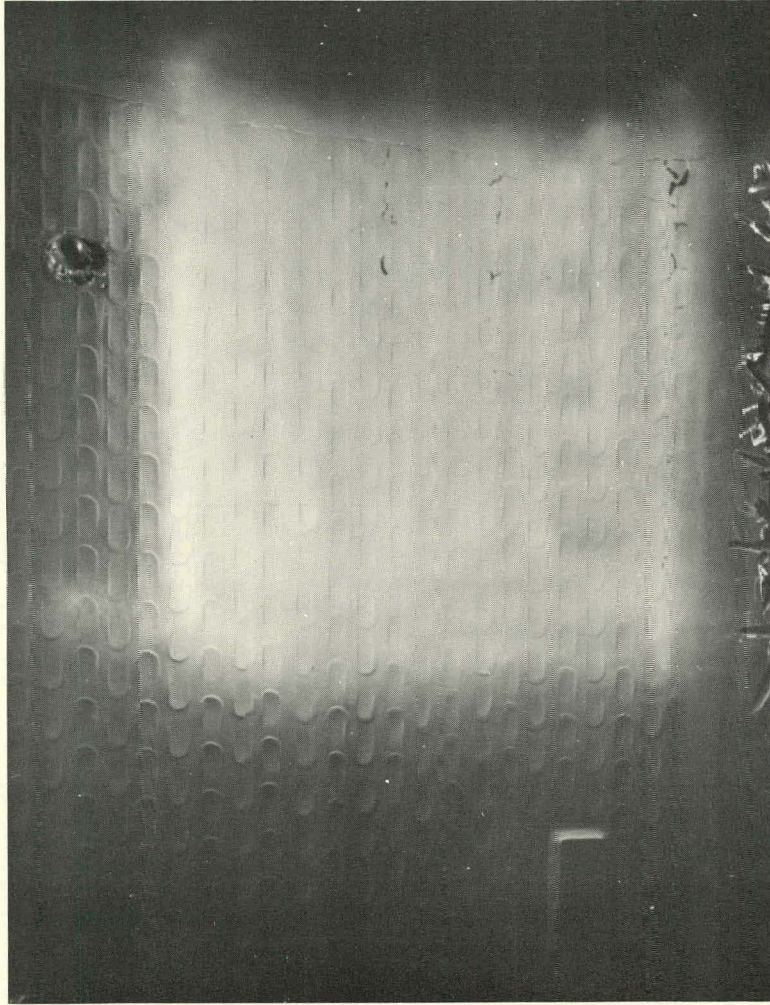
Typical dye-penetrant indications of cracking in Type 304 stainless steel cladding
